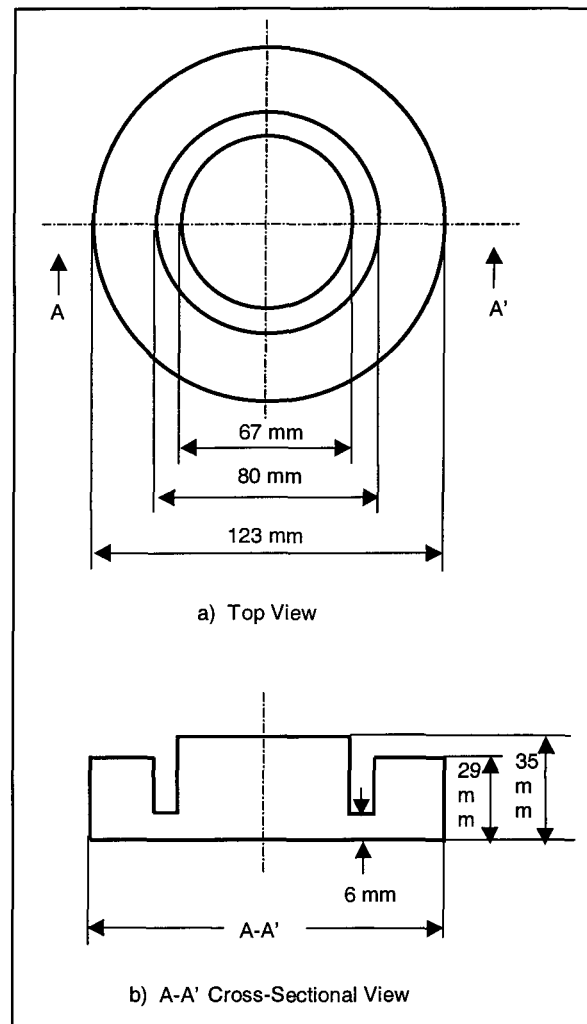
Shape and dimension of ring mold for casting hot-tearing test.
